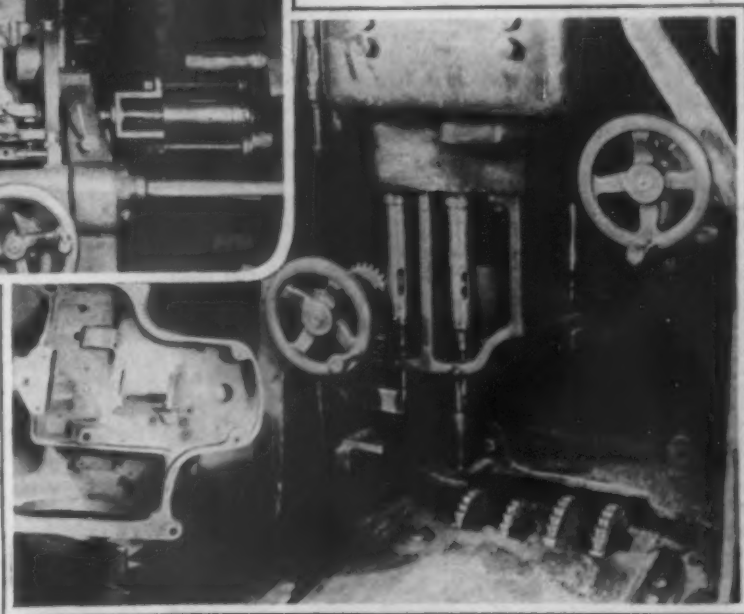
(above) Three-Way Drilling Machine With Five Vertical Drills and With Horizontal Drills Used in Machining Wringer Drive Box. Two castings are placed in the fixture, which is turned over after the first operation on each part and the remaining holes drilled
